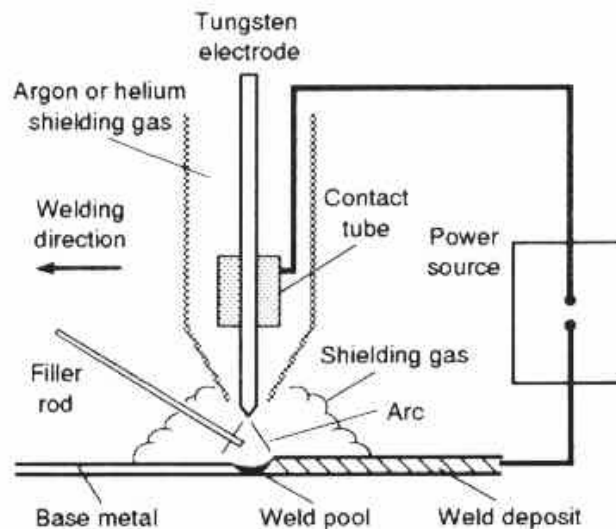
Cold-wire TIG welding (Kou, 1987)
